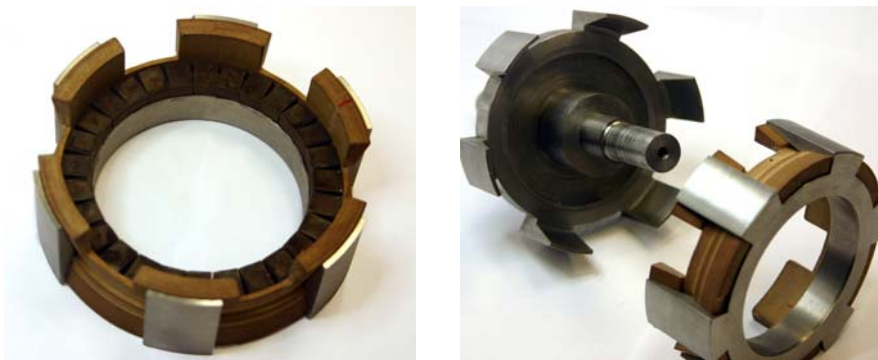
a) Magnets mounted on the non shaft mounted claw part. b) Both claw parts and the claw fixture
